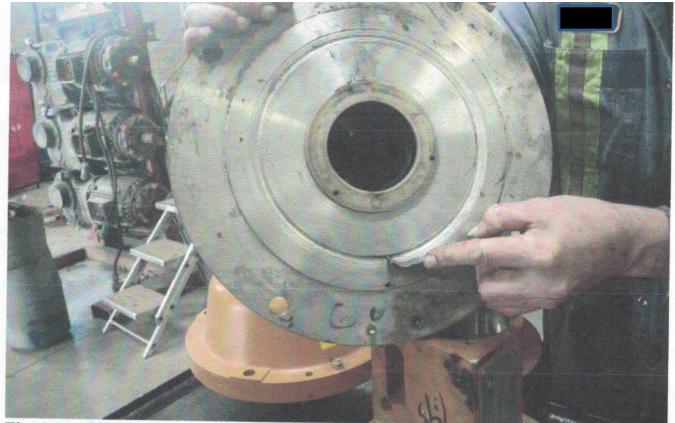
Machining damage to flat bottom plate by jamming of steel backing plate inside the rotating components. See Fig 7 for aluminum shavings.
